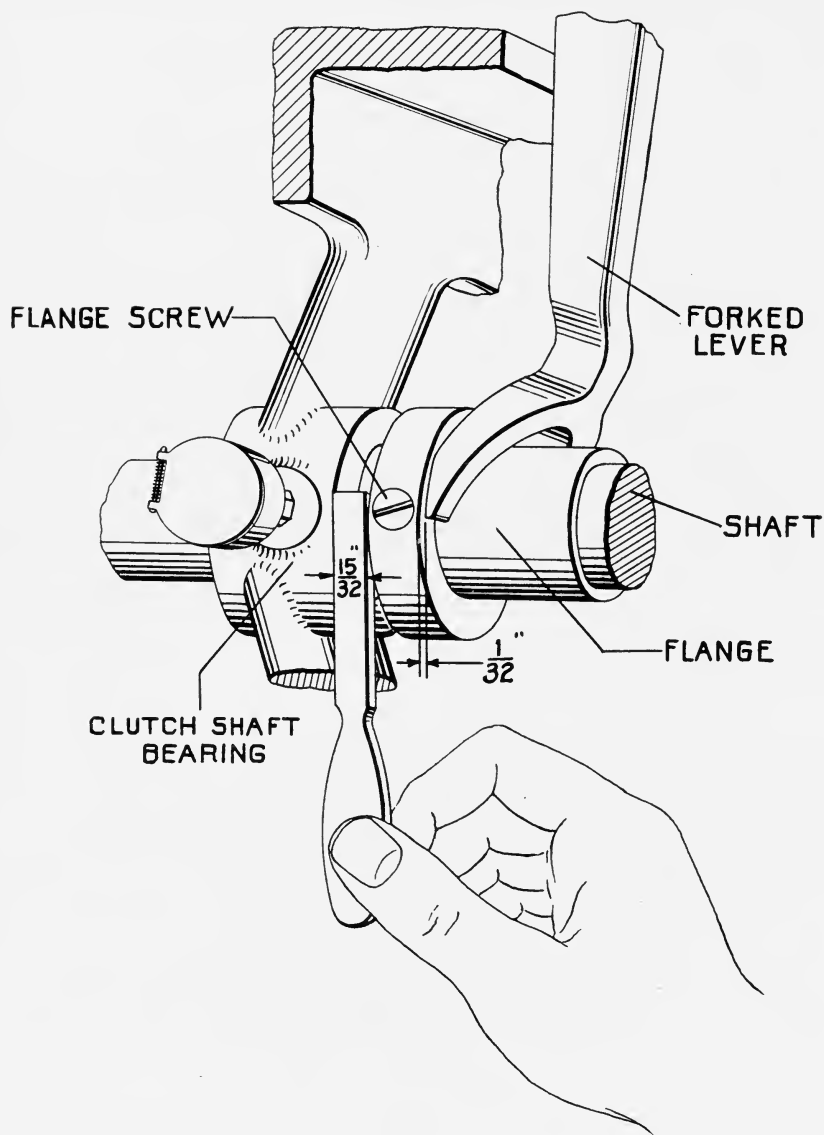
Application and Use of a Simple Gauge, $\frac{15}{32}$ " wide and about $\frac{1}{32}$ " thick to determine whether the space between the clutch shaft bearing and flange is correct when the machine is in action. The $\frac{15}{32}$ " space is obtained by underlaying the clutch arm leather buffers with thin cardboard. While the gauge is in the position shown, there should be $\frac{1}{32}$ " play between the flange and forked lever, which is obtained by adjusting a screw in the upper stopping lever.
